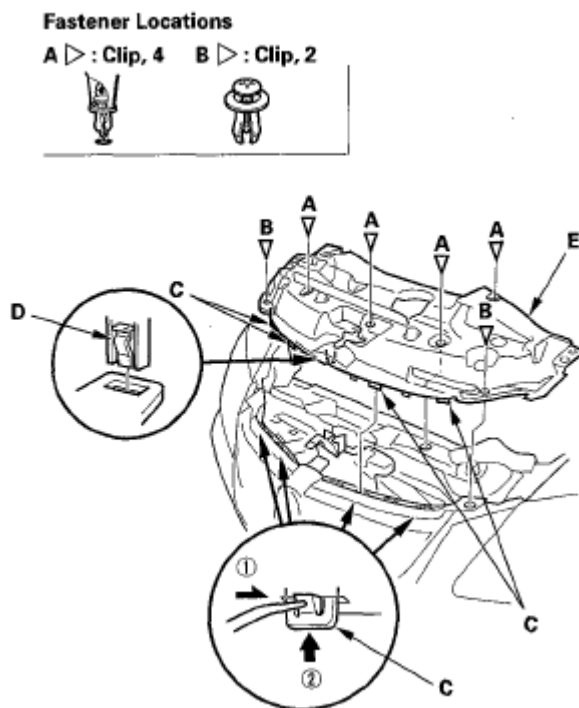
Identifying Upper Grille Cover, Clips And Hooks
